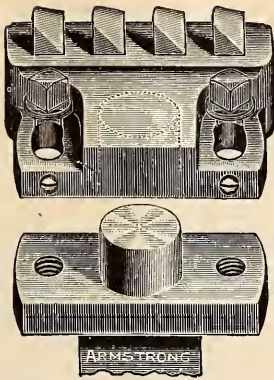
CONSTRUCTION OF THE ARMSTRONG GANG PLANER TOOL.
